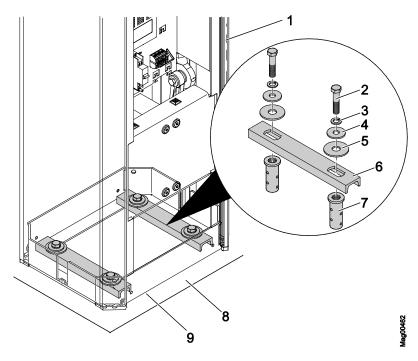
Assemble barrier housing - Access XL2 and Access XXL
